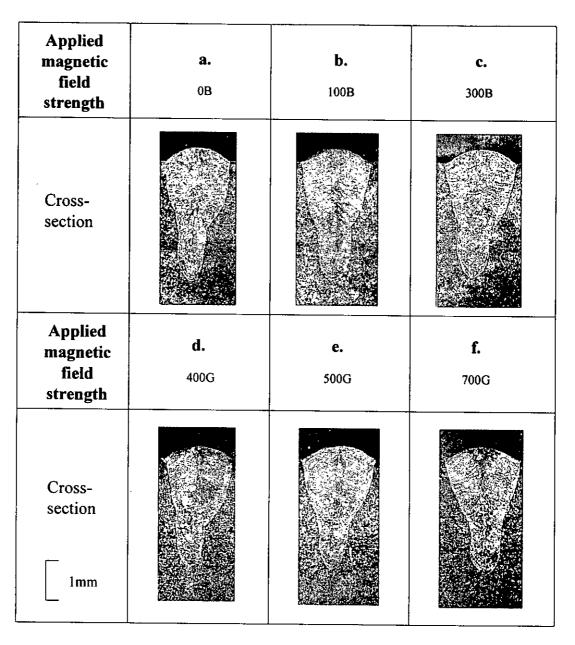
14: The effect of magnetic field on the weld bead profile at 750mm/min and 1500W under helium coaxial shielding.
